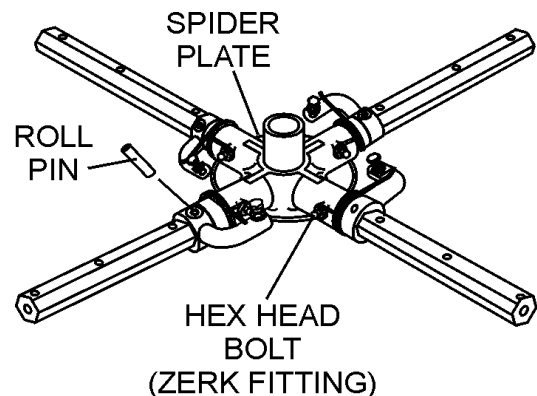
Removing Roll Pin and Zerk Grease Fitting
